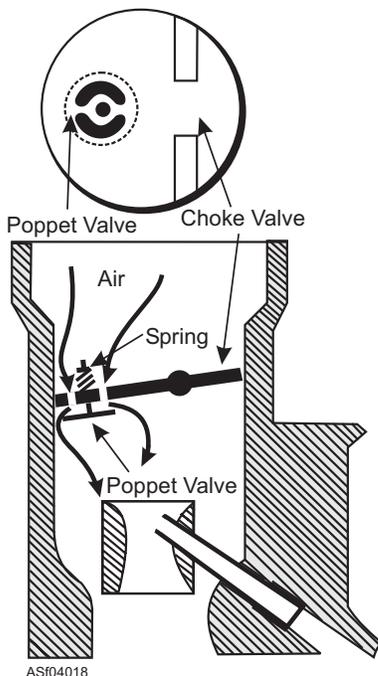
Spring-loaded poppet valve in choke valve.
